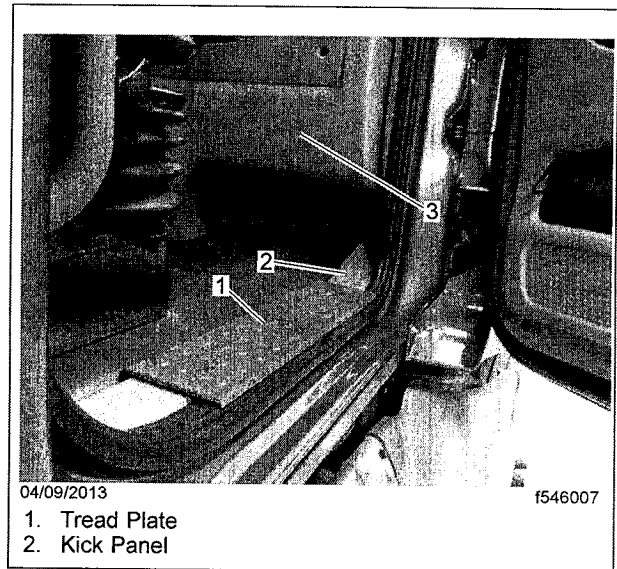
, Passenger-Side Tread Plate and Kick Panel
